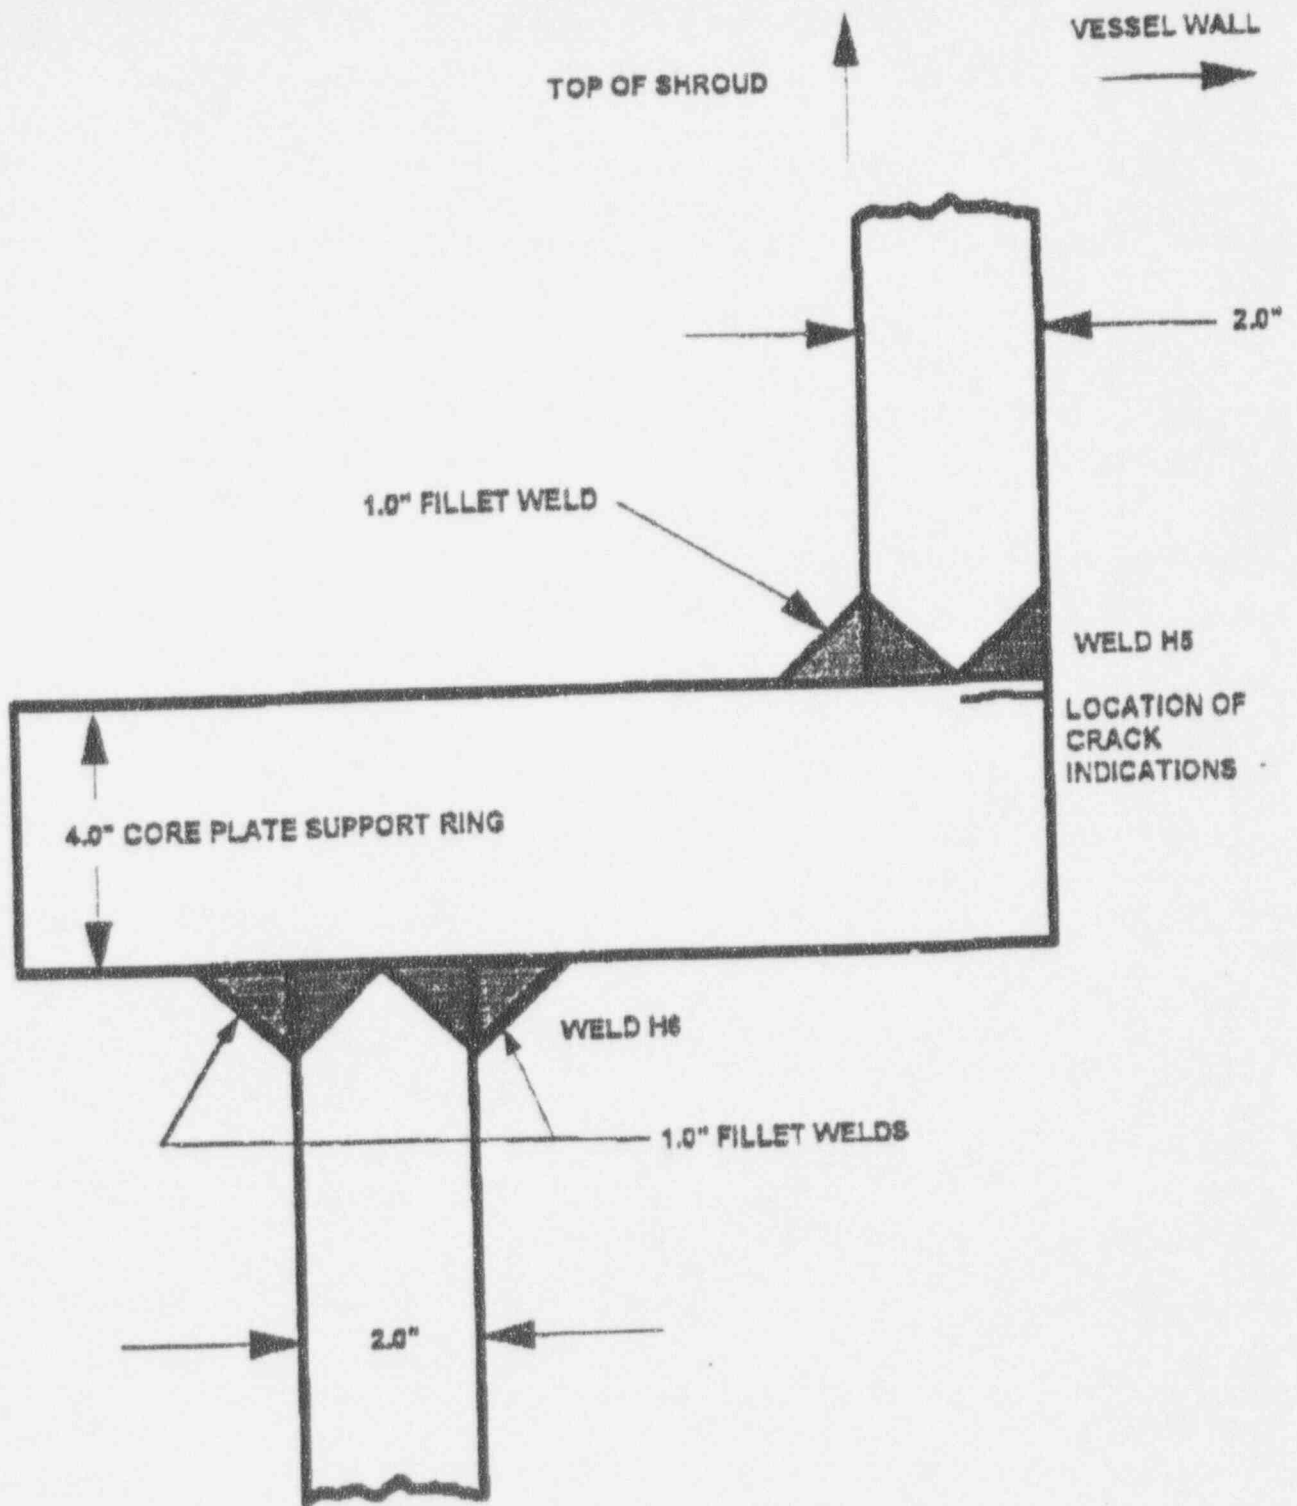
H5 WELD DETAILS AND CRACKING LOCATION
